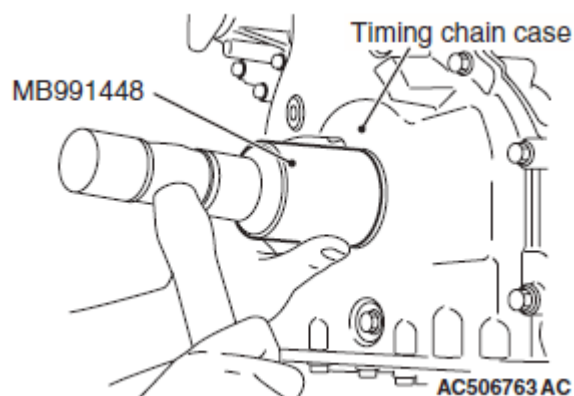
Pressing Crankshaft Front Oil Seal Using Special Tool MB991448
